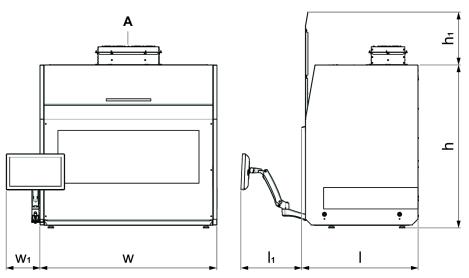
Dimensions, e.g. Magni Flex Enclosed Frame 44A00-6G-XE
